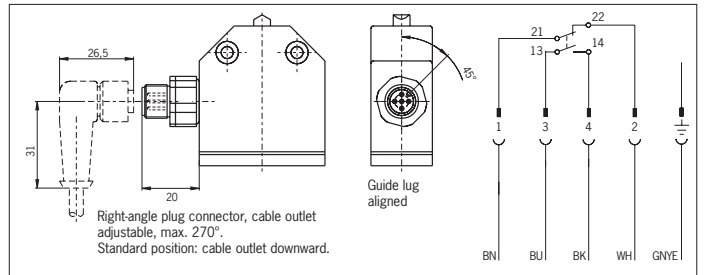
Dimension drawing/connection diagram SN01.558SVM5 with plug connector M12 (SVM5, 5-pin)
